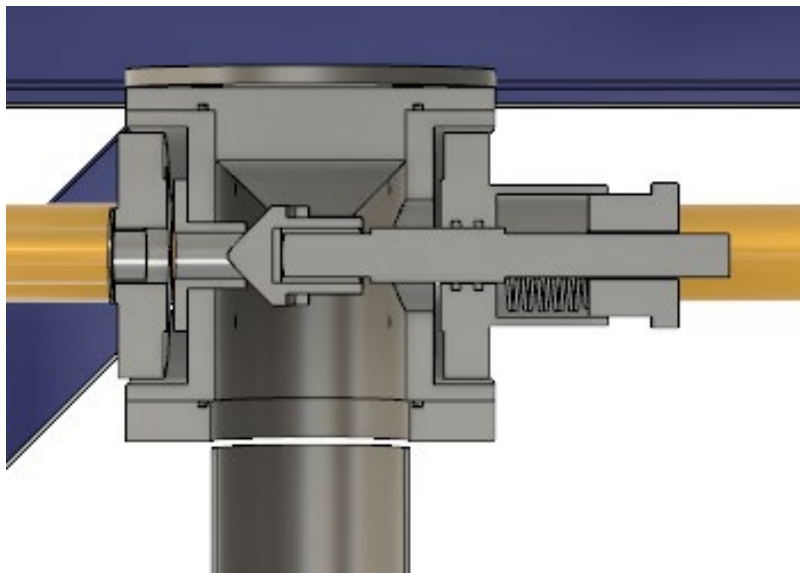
Manure outlet valve. A spring loaded conical piston is pressed against the valve seat.
